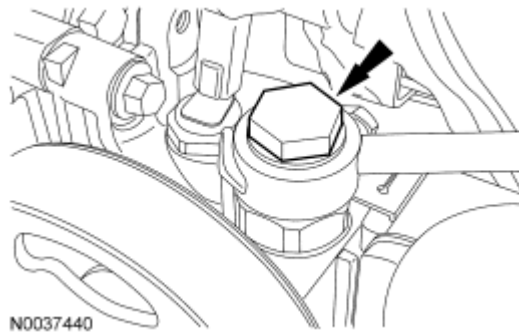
Locating Power Steering Pressure (PSP) Tube Bolt
